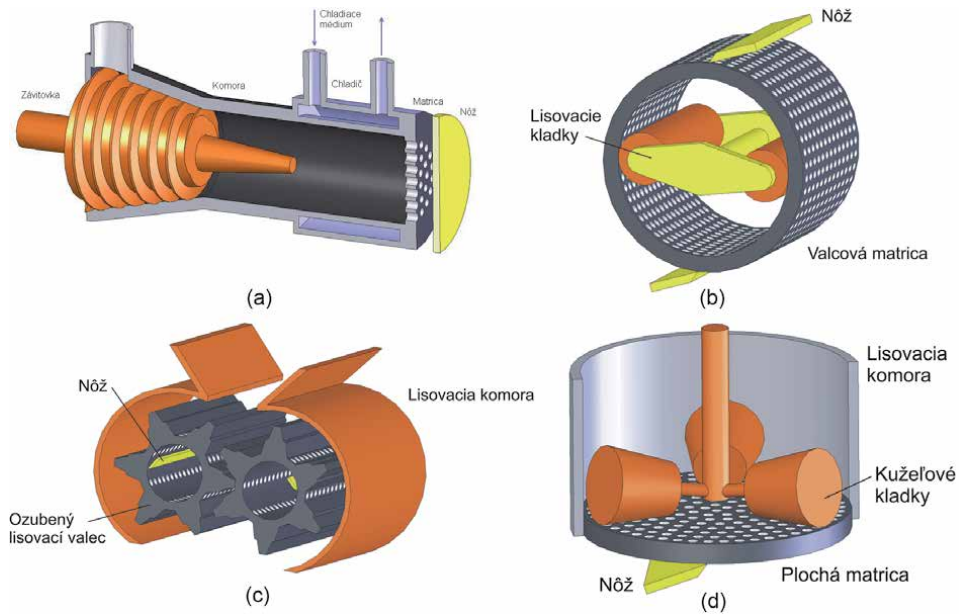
Pelleting machine. (a) Horizontal screw, (b) cylindrical rollers and cylindrical die, (c) horizontal with gears and (d) vertical with conical rollers and a flat die.
